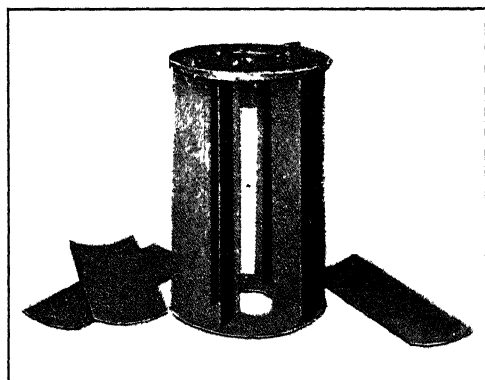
THE CONTAINER, OR DRUM-LINING.
